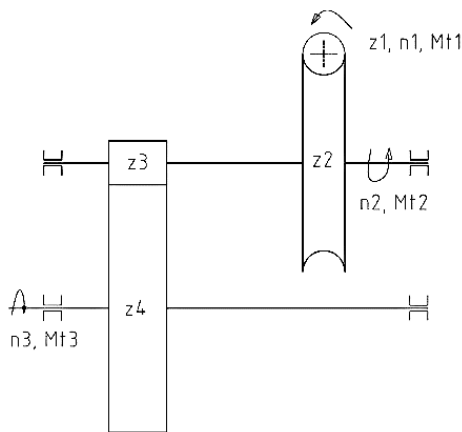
Sketch of the gearbox; the analysed shaft with gears is marked by darker lines
